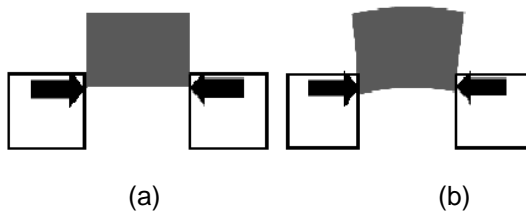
Bent workpiece once clamped (b) compared to its initial unclamped state (a)
